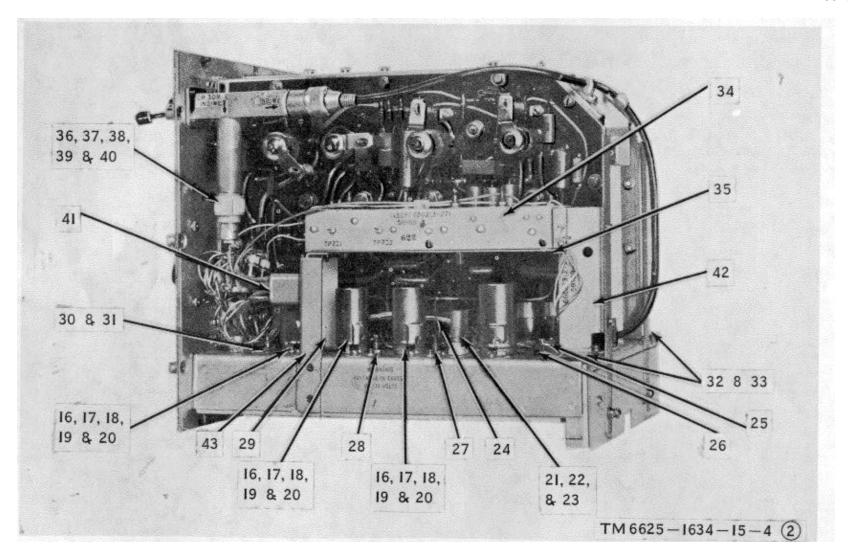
(2). Electrical equipment chassis (sheet 2 of 4).
